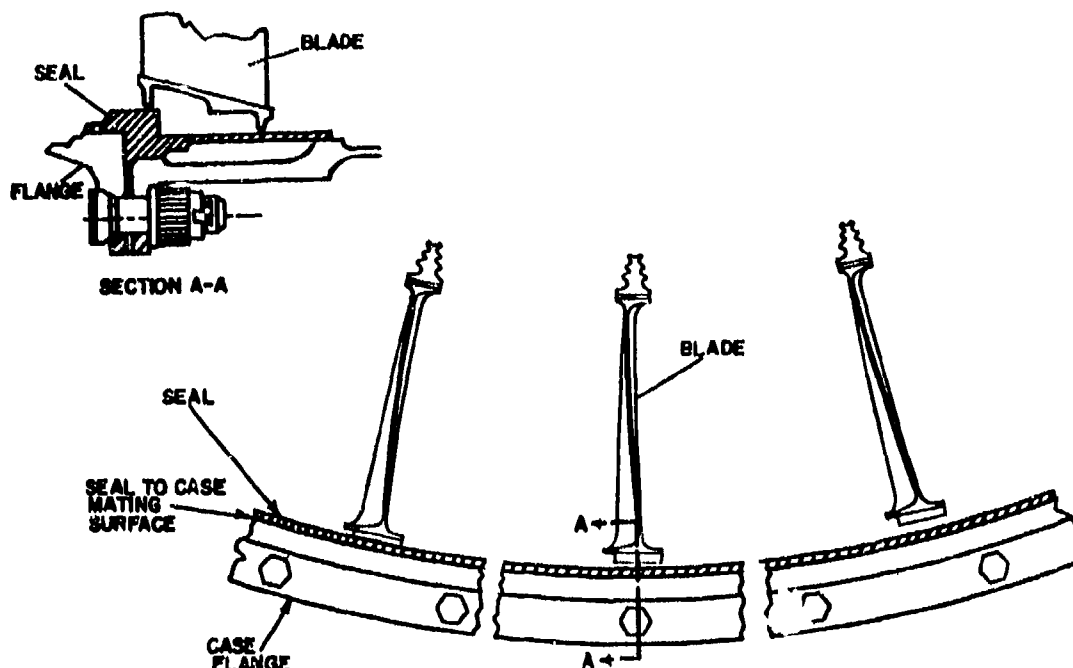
This sketch depicts result of case out-of-roundness causing turbine outer seal to conform to case, resulting in inadequate and excessive seal clearances. The left blade shows tip rub; the middle blade shows the correct clearance; the right blade shows excessive clearance.
